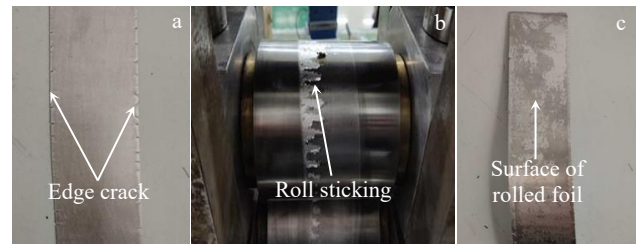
Appearances of rolling defects of magnesium alloy strip: (a) edge cracks, (b) roll sticking, and (c) rolled foil
